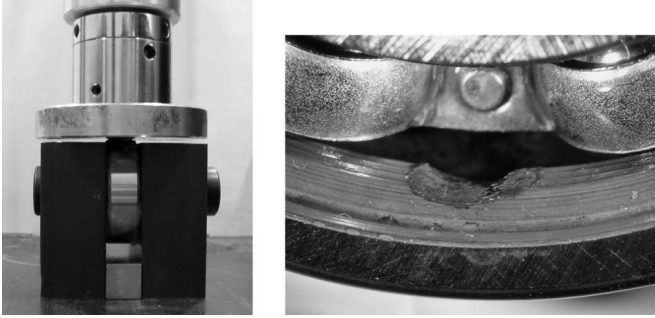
(Left) Photograph of the test setup for making bearing brinelling damages. (Right) Microscope photograph of the single defect created by chemical etching.
